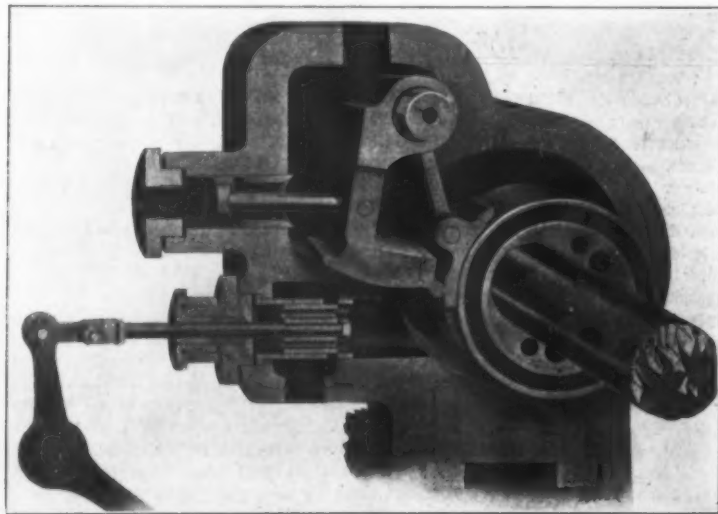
SECTIONAL VIEW OF HARRIMAN ROTARY ENGINE.
